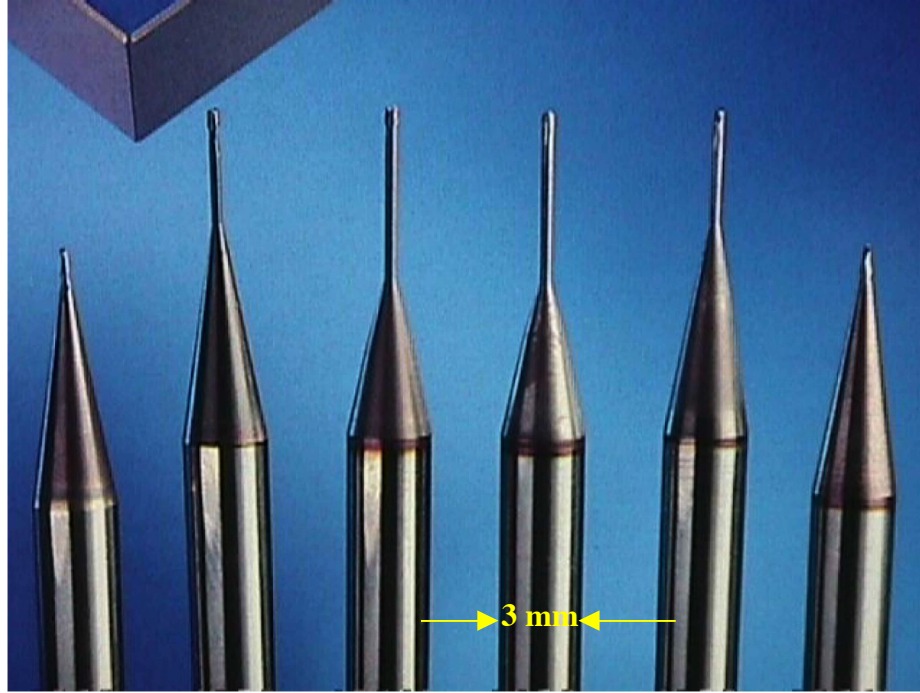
Photograph of miniature milling tools. Short tools at the ends, long inside them and extra long tools at the center.
